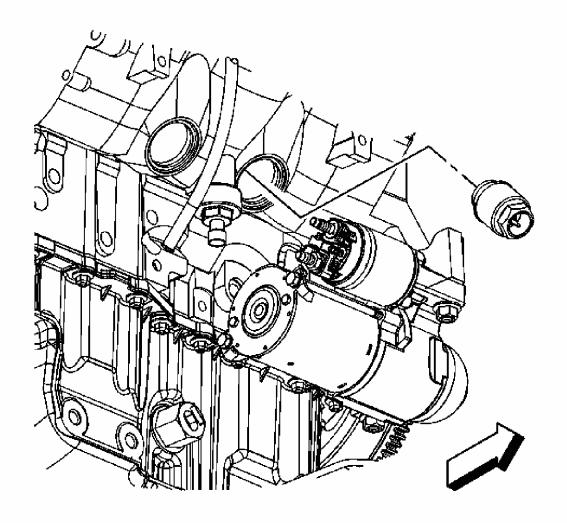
Locating Coolant Heater Courtesy of GENERAL MOTORS CORP.
